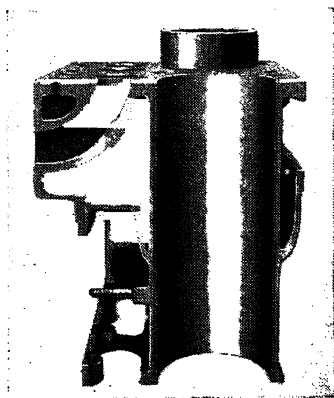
WET LINER ASSEMBLY FIG. 23. DRY LINER ASSEMBLY
